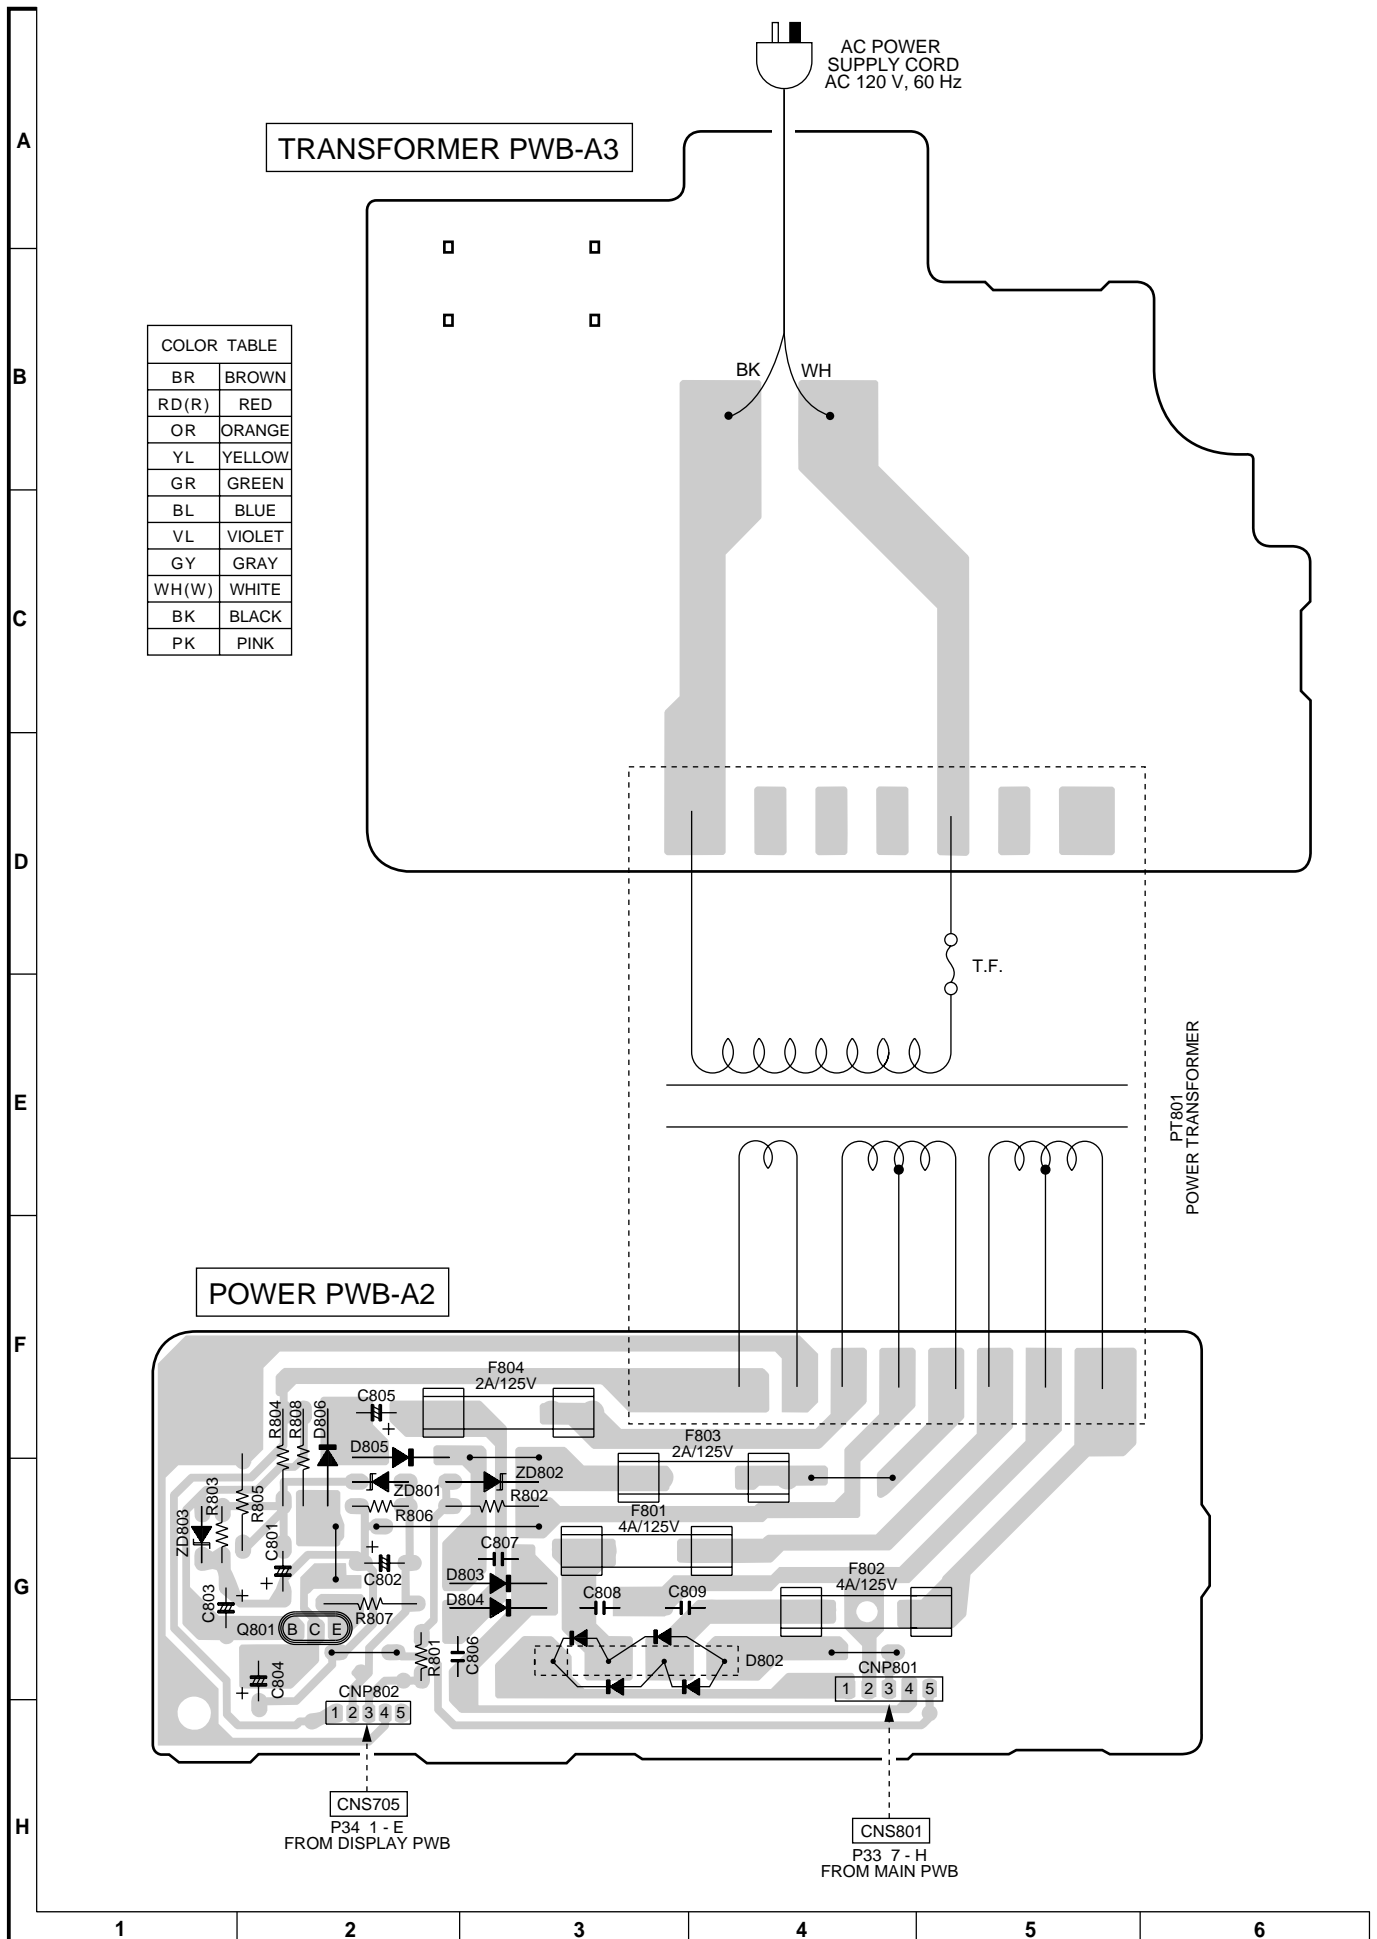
WIRING SIDE OF P.W.BOARD (777)
